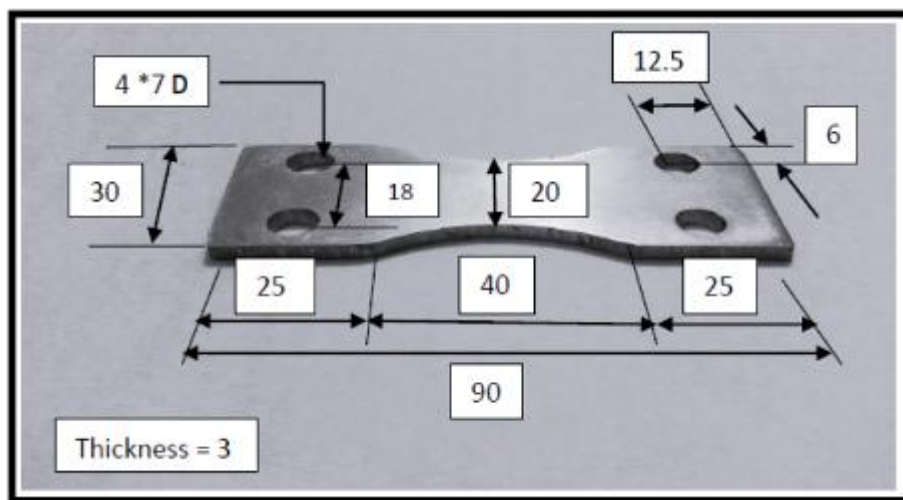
Geometry of fatigue specimen (dimensions are in millimeter) [ASTM].
